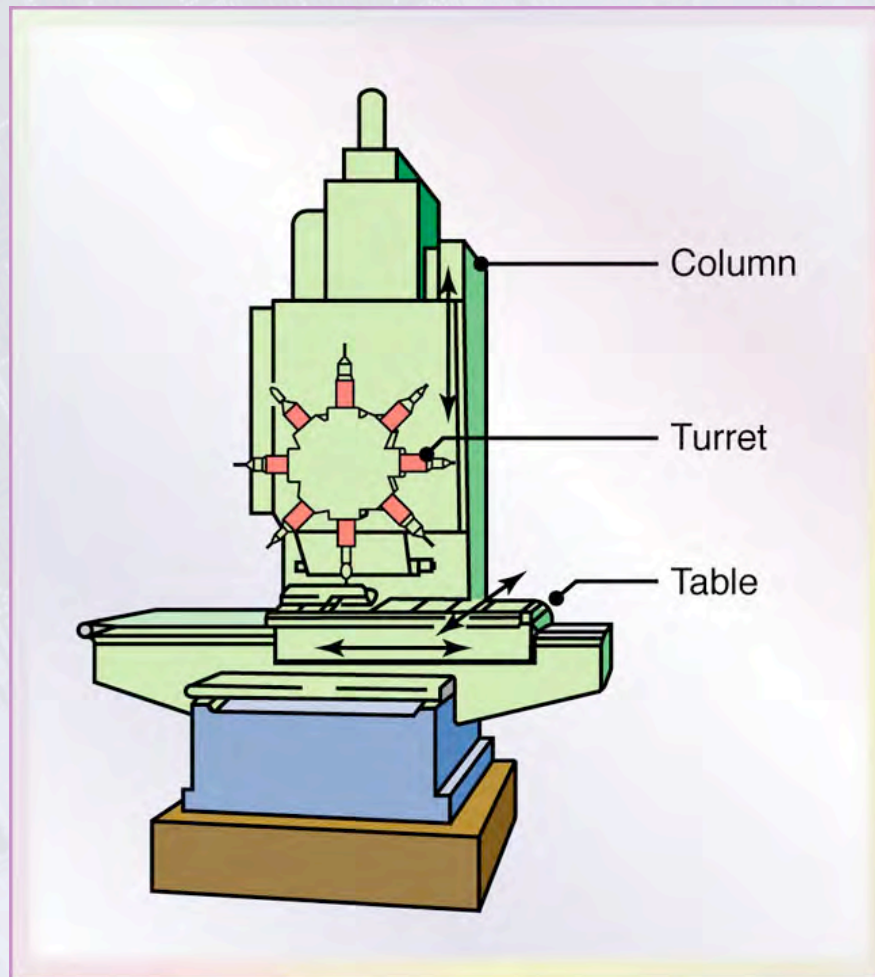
A three-axis computer numerical-control drilling machine. The turret holds as many as eight different tools, such as drills, taps, and reamers.
